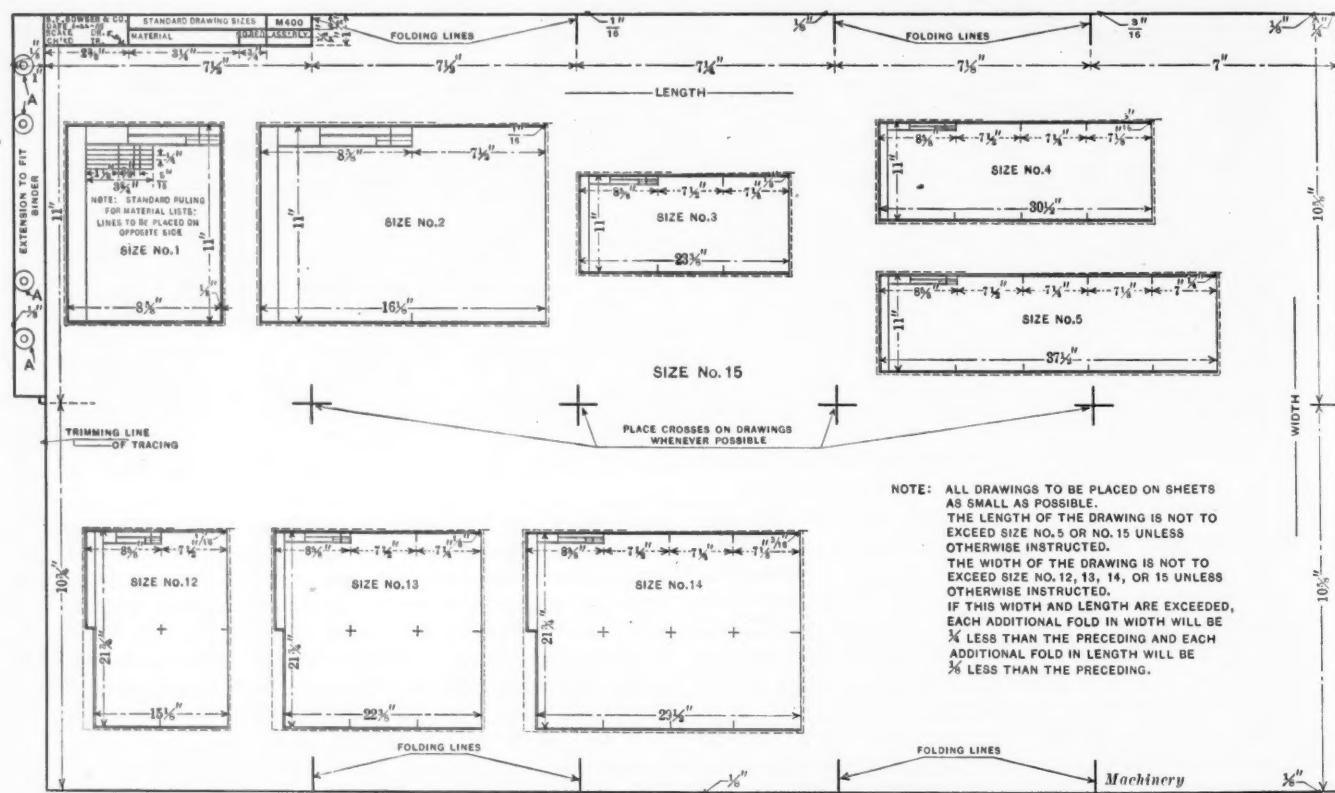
Reproduction of Blueprint showing Location of Title, Provision of Extension to fit Binder, Folding Lines which indicate Points at which Sheets should be folded up, and Linen Guard Rings A used for repairing Prints when torn out of Binder
